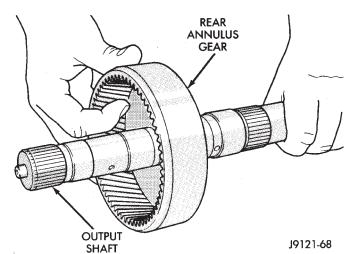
Installing Rear Annulus Gear On Intermediate Shaft—46RH
